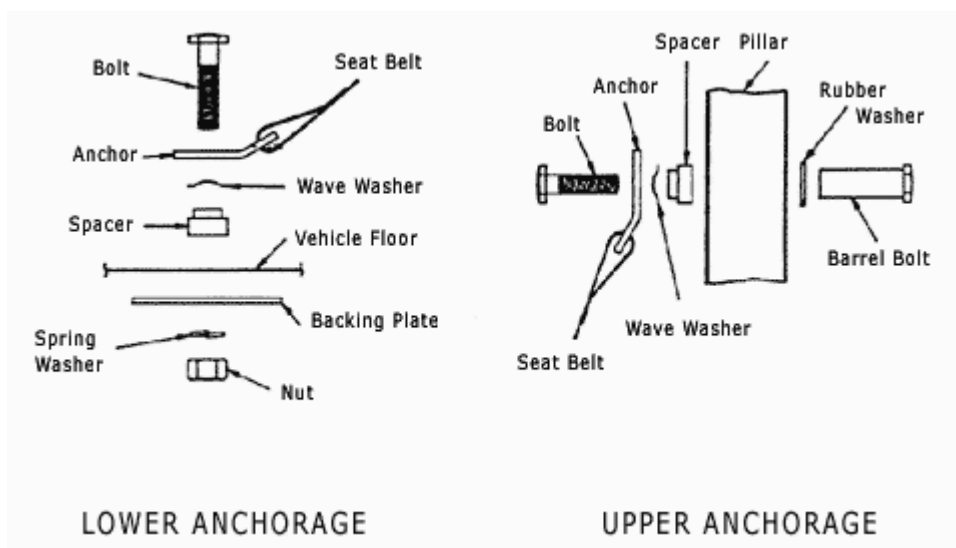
Typical Lower Anchorage and Upper Anchorage Installations
